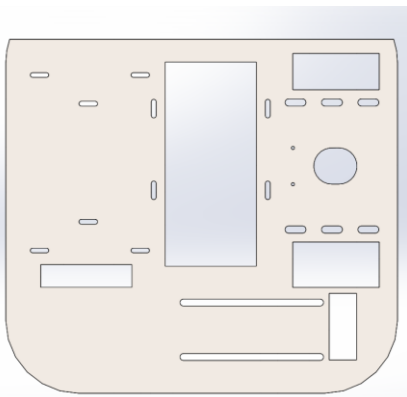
Bottom Mounting Plate. SolidWorks 2020.
